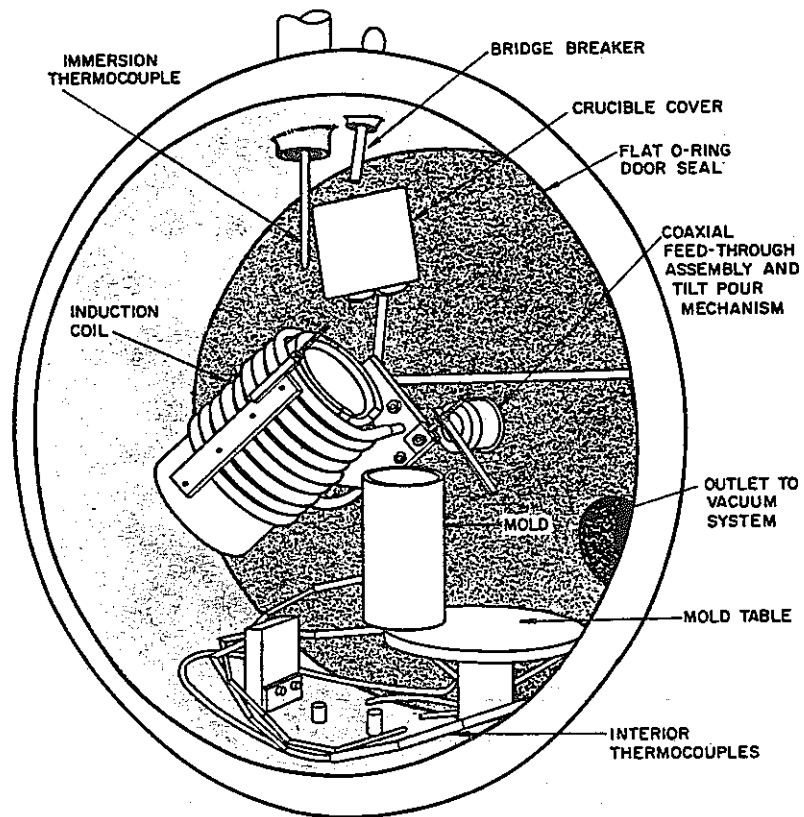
Interior of NRC furnace with crucible assembly tilted for pouring.
